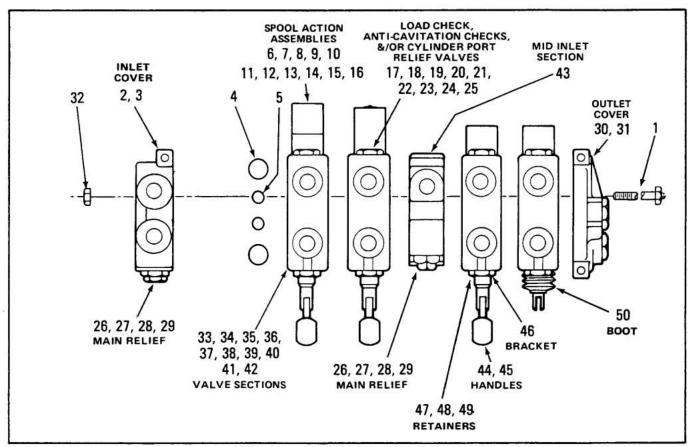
Model V20 Directional Control Valve, Typical Main Assembly.
